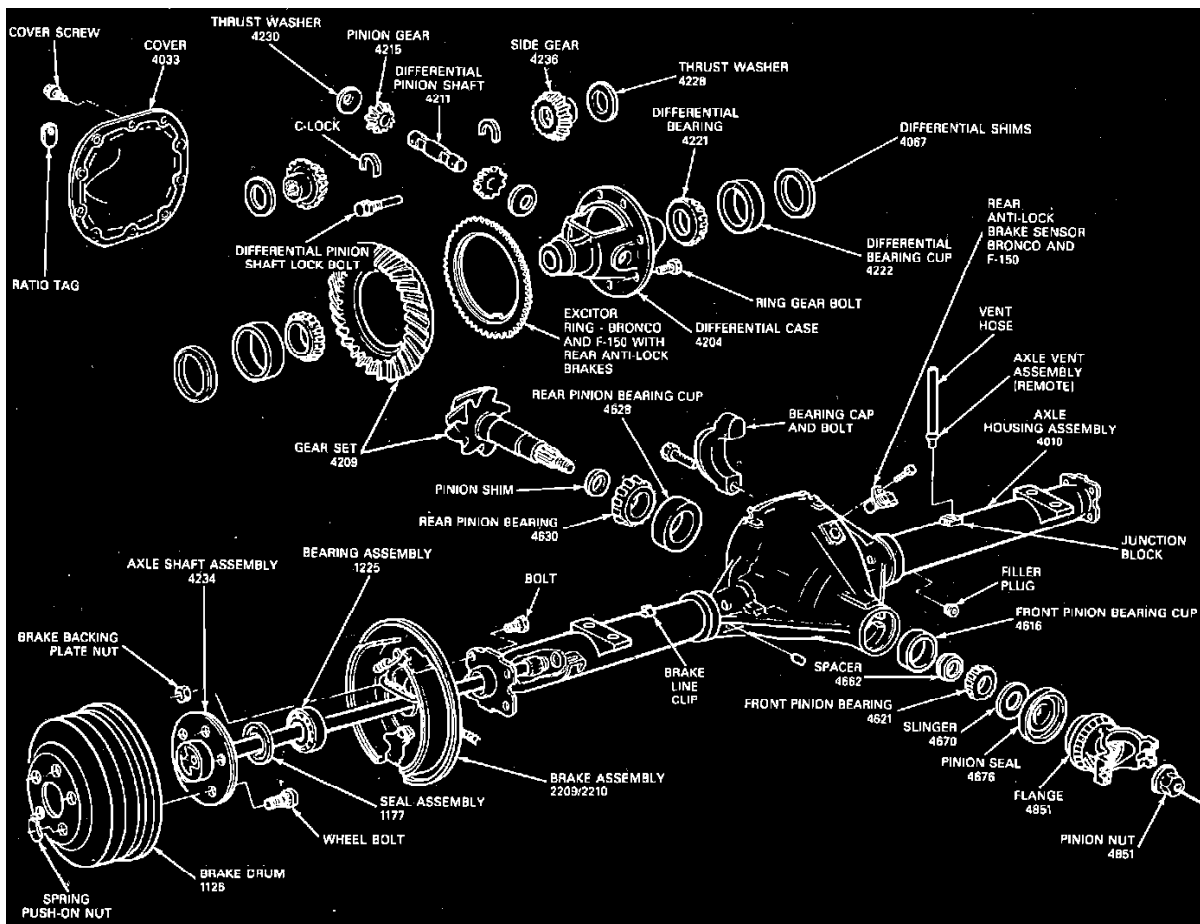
Exploded view of 8.8 inch ring gear axles. Models w/anti-lock brakes
